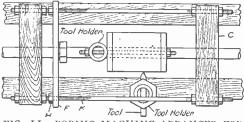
FIG. II. BORING MACHINE ARRANGED FOR TURNING
